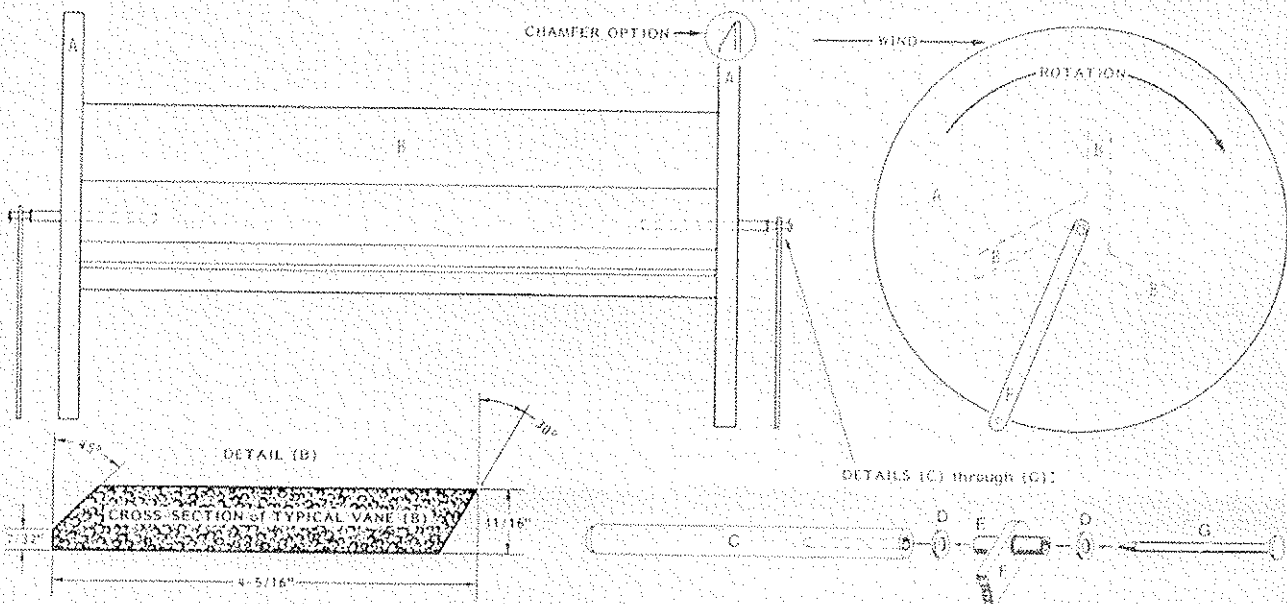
Hornbeam Rotor 661 Kite Details—Make two End-plate Disks (A) of 11/16" thick styrofoam. Drill a 1/4" diameter hole in each center; finish outside diameters to 13-1/2". Make three Rotor Vanes (B) 20-1/2" long; accurately reproduce the cross-section that is shown in Detail B. Make two Pivot Bosses (C) of 4" lengths of 1/4" diameter birch dowel; chamfer one end of each; drill the other ends—accurately centered—3/32" diameter and 1" deep. Purchase or make four Washers (D): 1/4" outside diameter; 0.100" bore (use brass, steel, or nylon about 0.020" thick). Make two Pivot Bearings (E) of brass tubing: 1/8" outside diameter; 0.013" wall thickness; 3/4" long. Make two Leaders (F) of 1/8" x 3/8" x 7-1/2" spruce; drill 1/8" diameter holes 1/4" from the ends. Use epoxy cement to fix each Pivot Bearing (E) in one end of each Leader (F) (see detail). The two Pivots (G) are made from six-penny (6d) iron box-nails (0.093" in diameter and 2" long; file and polish away any asperities that were caused by the painting and cold-heading process.)
